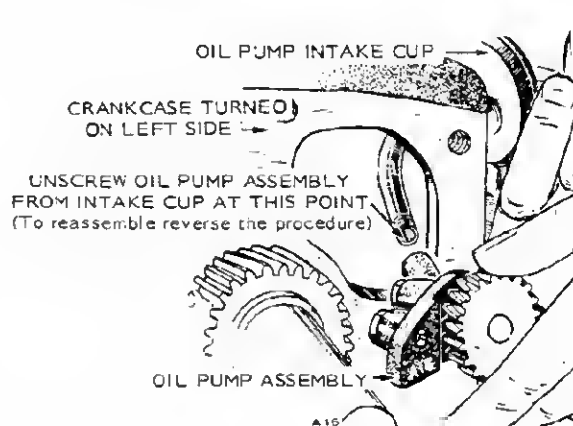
OIL PRESSURE PUMP ASSEMBLY
